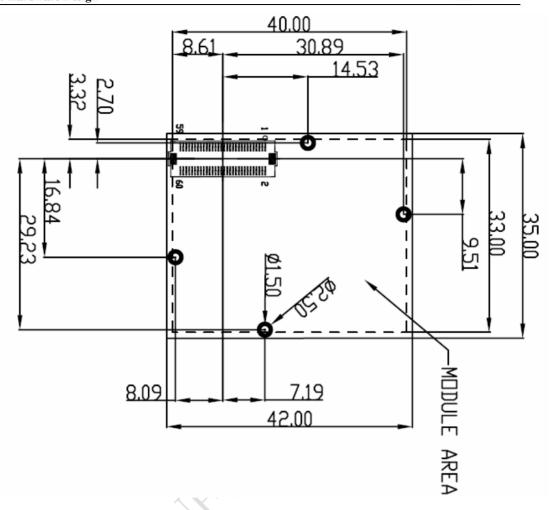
Mechanical dimensions of module PCB decal (Unit: mm)
